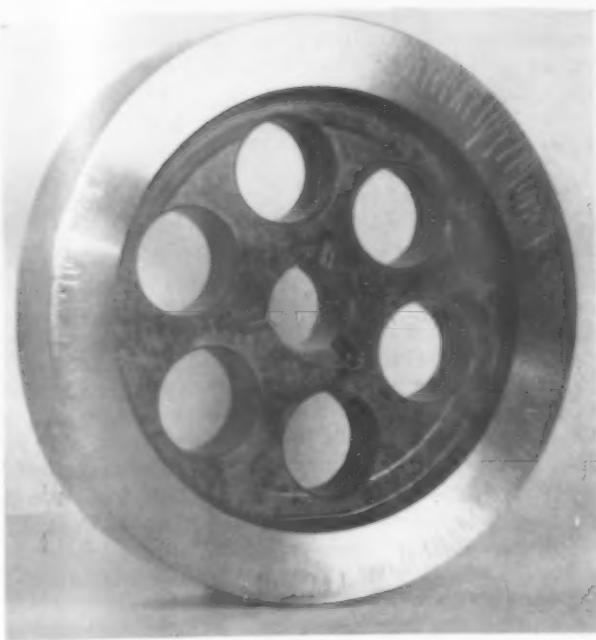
Radial surface cracks, perpendicular to circular grinding marks.
